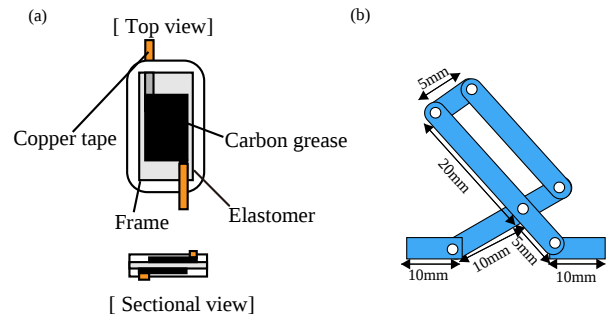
Components of prototype. (a) Structure of DEA. (b) Pantograph dimensions,
